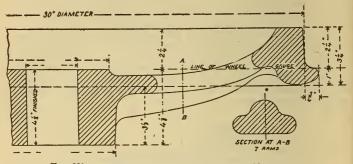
SECTION OF NEW YORK CAR WHEEL, 30 INCHES.
